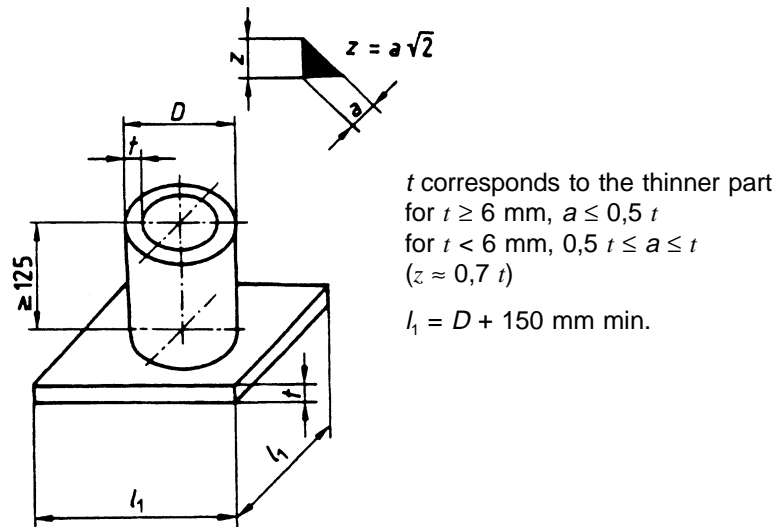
Dimensions of test piece for a fillet weld on pipe
